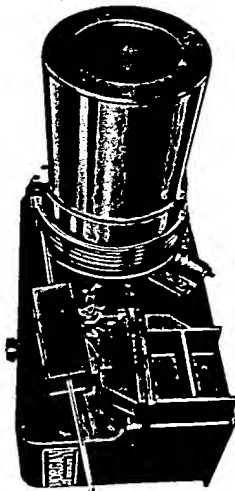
Single block, horizontal-spindle machine, direct-connected bull block. (Courtesy Morgan Construction Co.)
